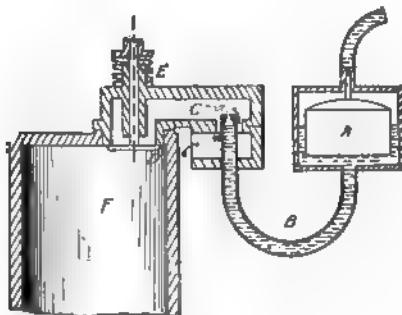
Maybach's Original Float Feed Carburetter. A is the hollow float carrying the spindle of the needle valve at its top; B, the tube leading into the inlet valve space; C, the spraying nozzle; D, the inlet valve; E, the inlet valve spring; F, the cylinder space.
